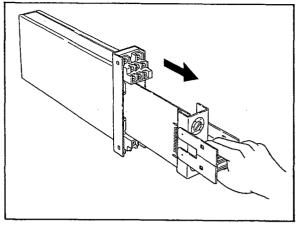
Removing the Internal Assembly (SDBU-21 ...).
